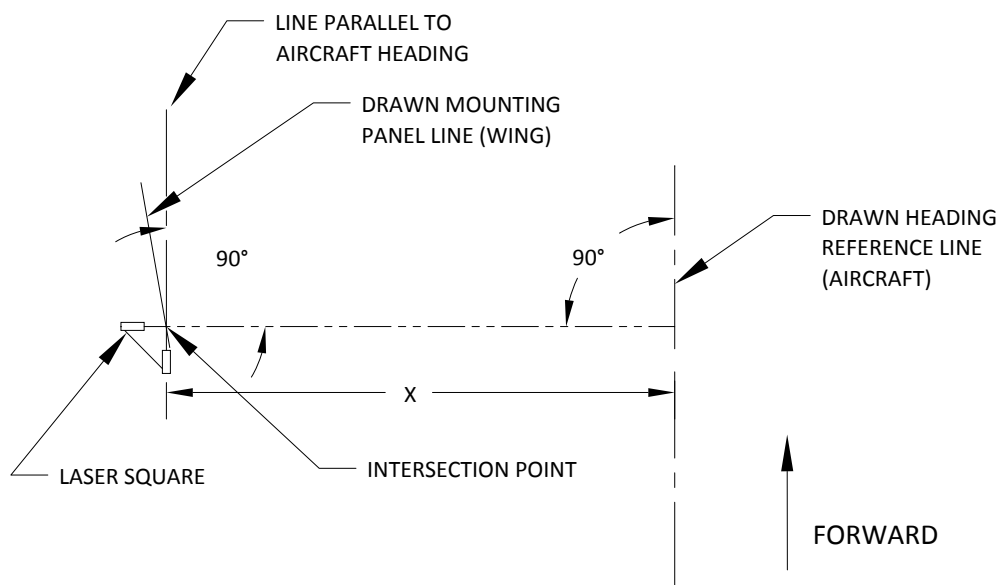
Transferring Center Line Step 2 (Laser Square Method)
